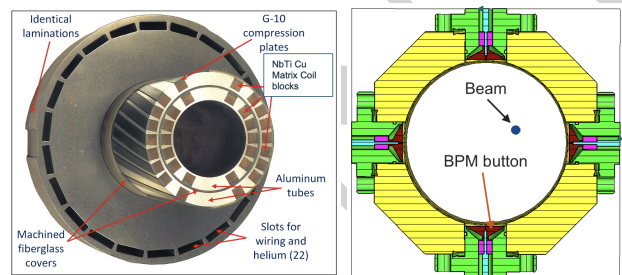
Geometry of the HSR cryogenic helical magnet assembly.
